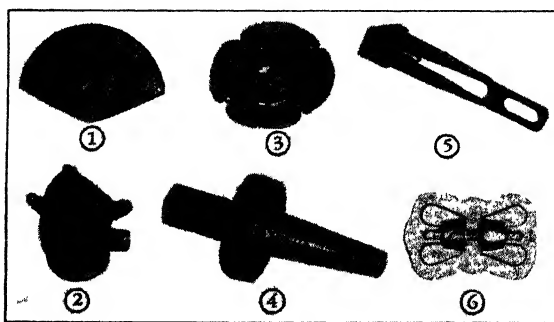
A group of brass press forgings, parts 3 and 6 being untrimmed.
